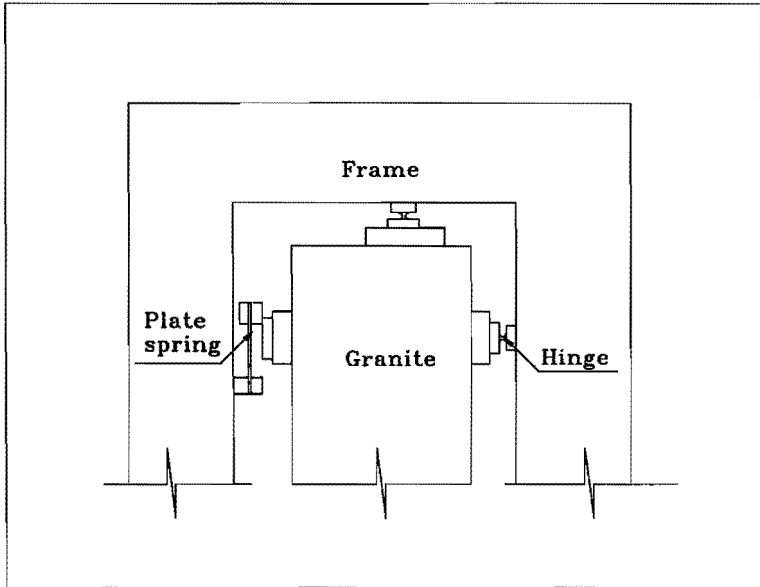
Illustration of the hinge-plate spring mounting pair
